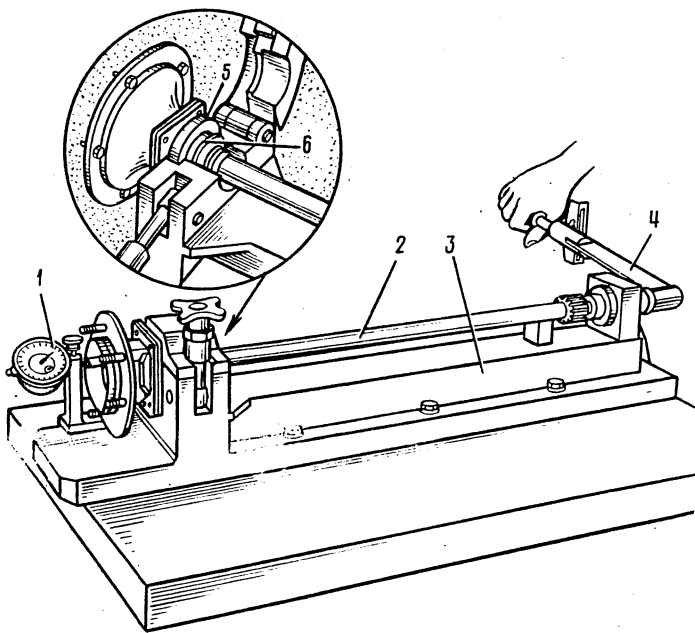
Checking the Fit of Axle Shaft Bearing Locking Ring:
